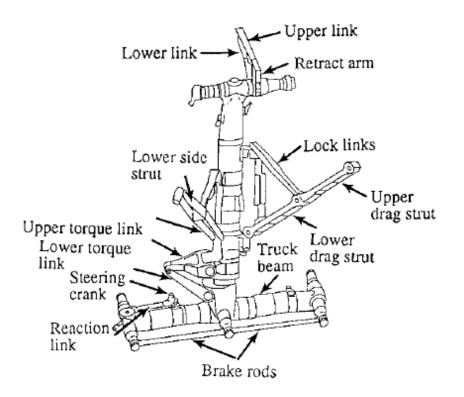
Main landing gear of Boeing 777 of forged
